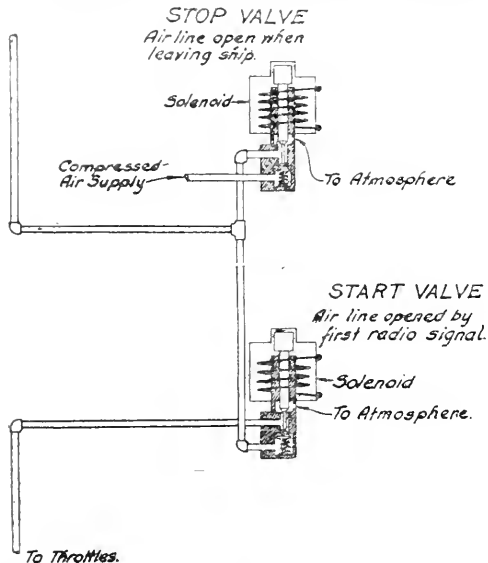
RADIO-CONTROL VALVES FOR OPENING AND CLOSING THROTTLE-CONTROL VALVE, FIG. 3
